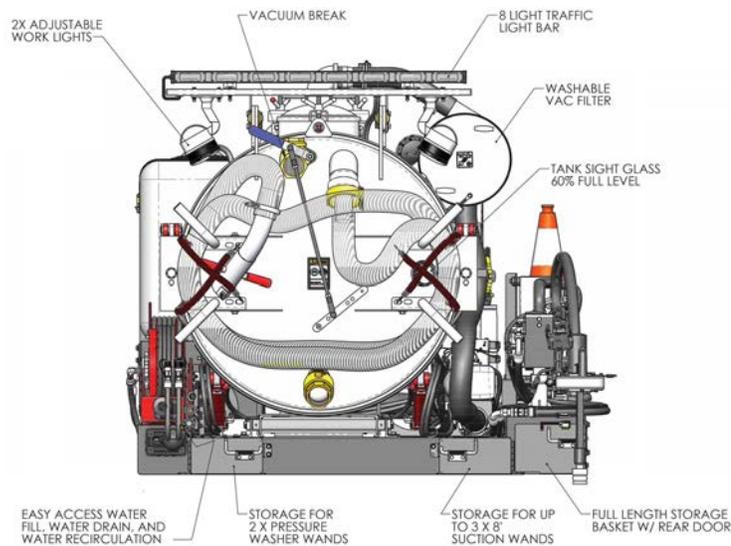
The drawing shows the rear view of the Standard LX (both diesel and gas configurations).
